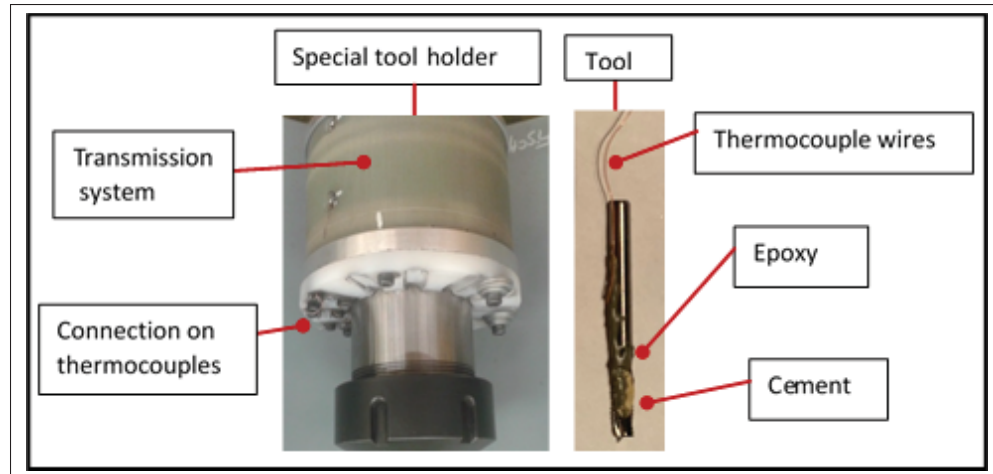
Schematic of cutting temperature measurement system (Tool holder and tool with thermocouples)
